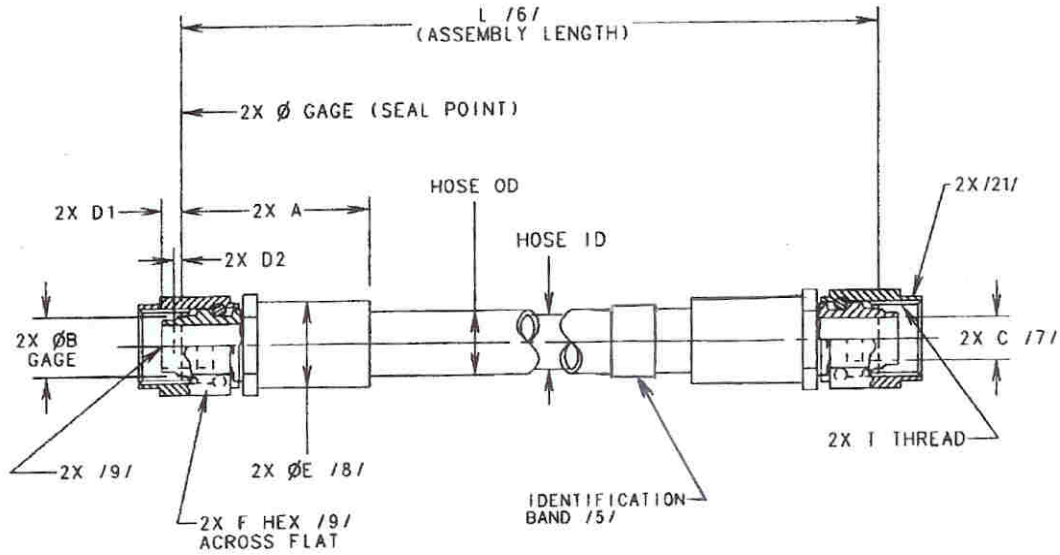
HOSE ASSEMBLY DIMENSIONS
